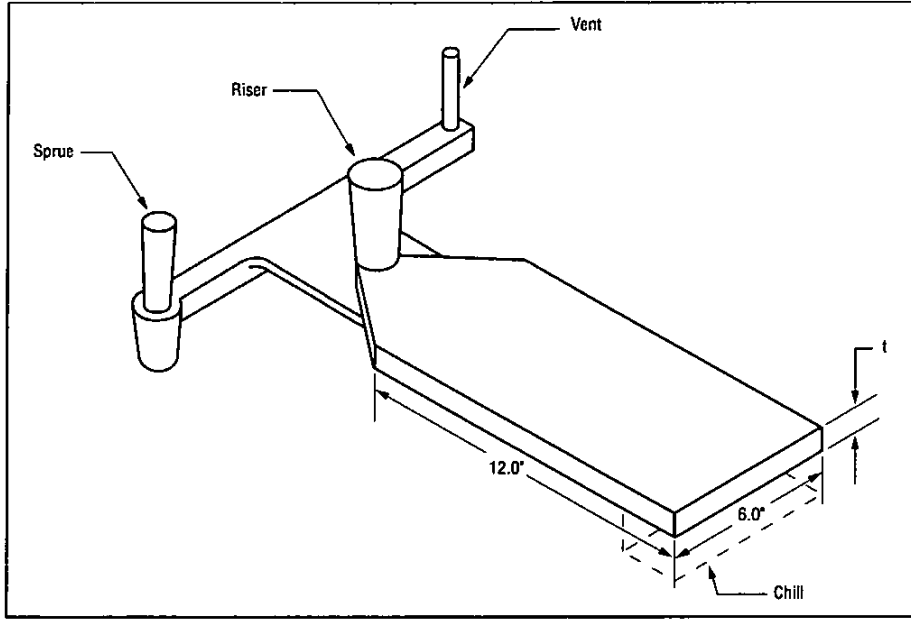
Test plate configuration incorporating a chill (Ref. 5)
